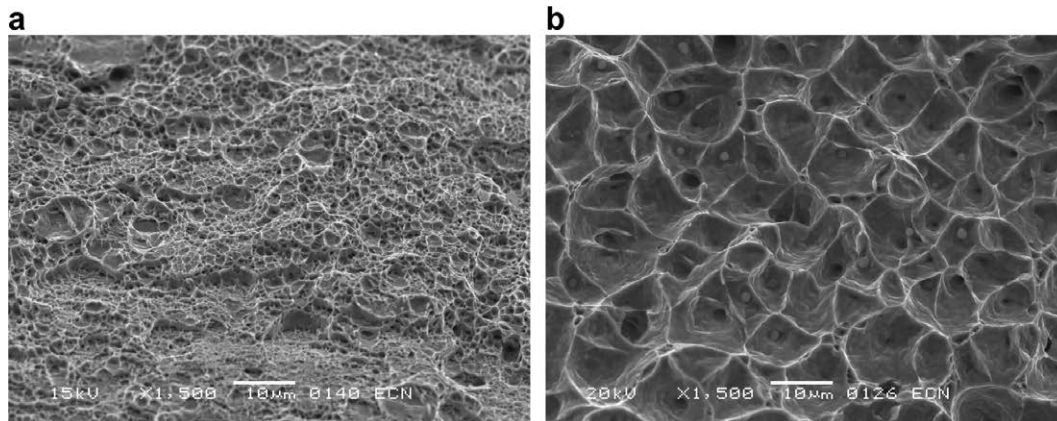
Fracture topography in TIG welded zone (a) and A-TIG welded zone (b) observed under SEM.
